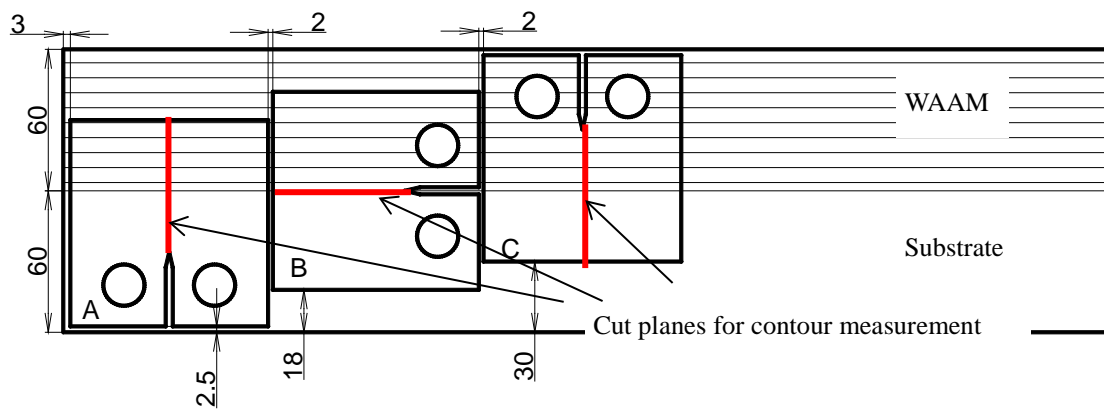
Position of C(T) specimens in Wall-Bi120 and cut planes in C(T) specimens for contour measurement, Type A, B and C specimens in terms of the crack position (unit:mm)
